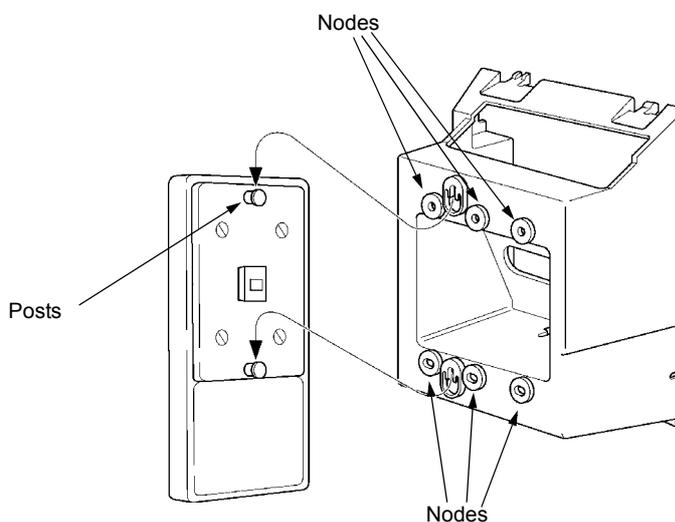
Attaching the Wall Mount Unit to the Wall
